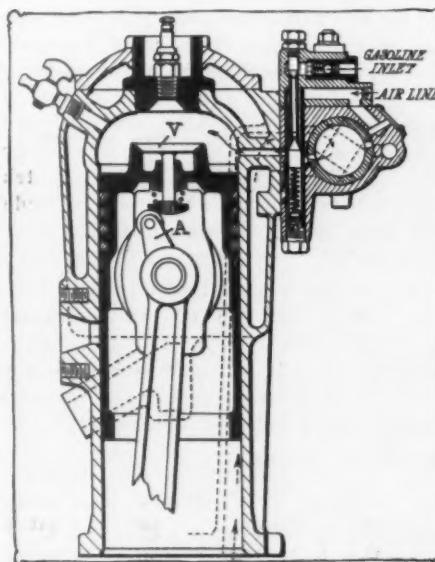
CROSS-SECTION OF CYLINDER OF CHURCH MOTOR
